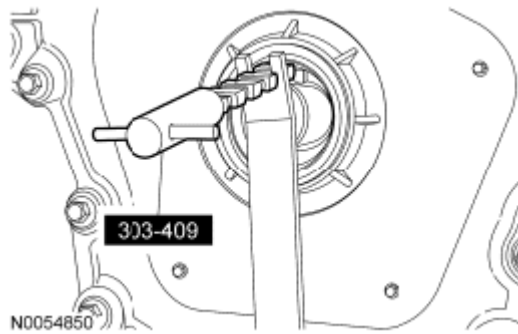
Locating Crankshaft Front Seal Using Oil Seal Remover
